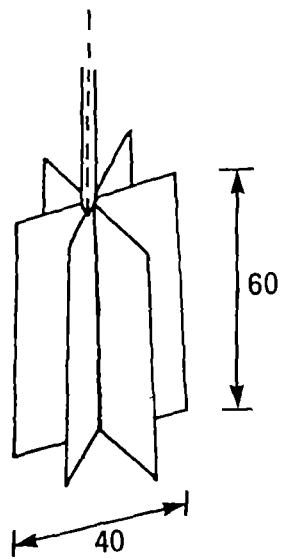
(b) IMPELLER DIMENSIONS (MILLIMETERS)
